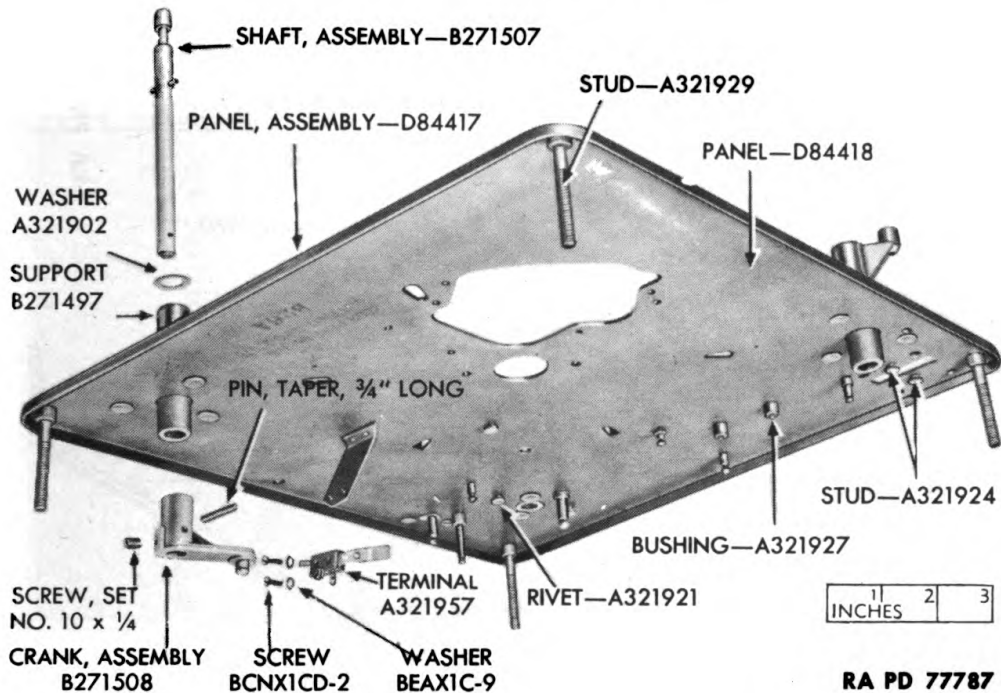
Removal of Selector Crank and Lead Terminal With Related Parts From Record Changer
